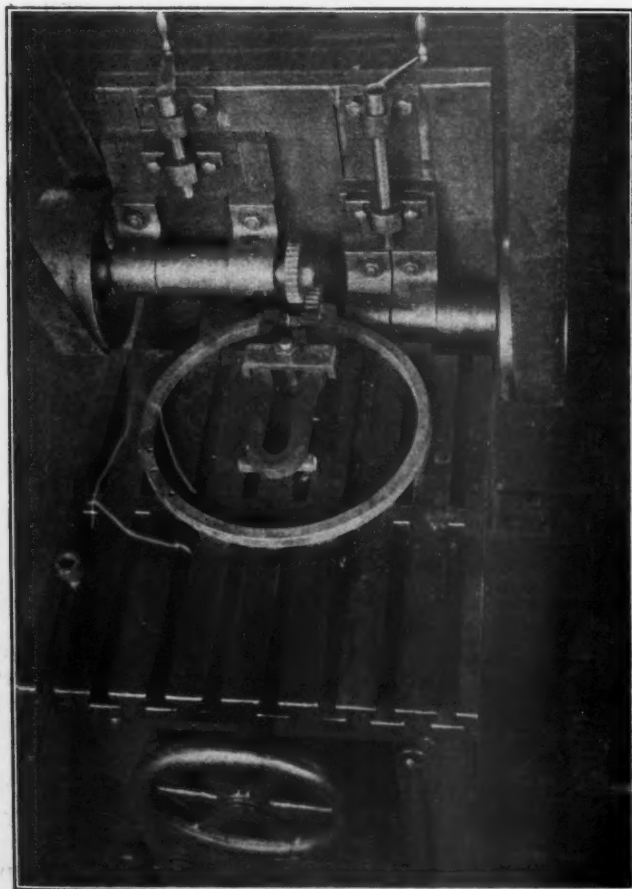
SNAP RING MILLING MACHINE. WHAT A MACHINE FOREMAN WILL DO WHEN ENCOURAGED.
